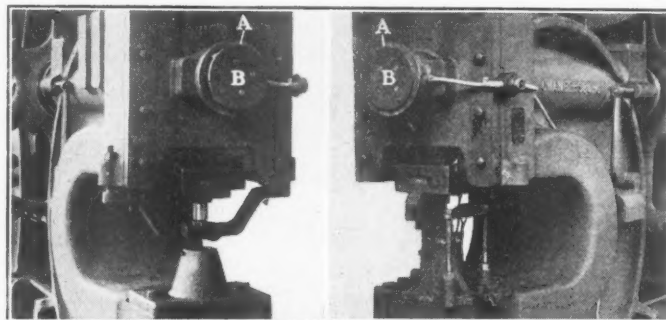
Control Head in Adjusting Position on Punching Machine (Right) Shearing Machine with Control Head in Operating Position
